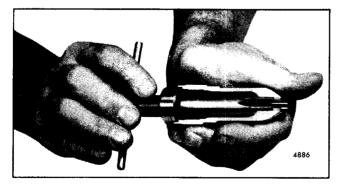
Cleaning Injector Nut Spray Tip Seat using Tool J 4986-01
